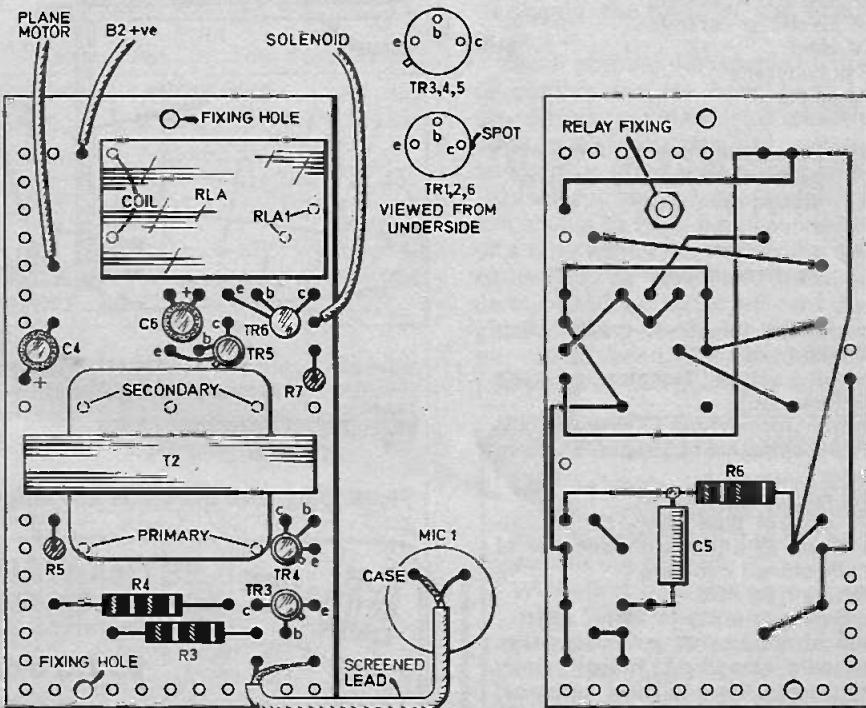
The receiver component board. Shows the components mounted in position on the plain matrix board and wiring up details.
